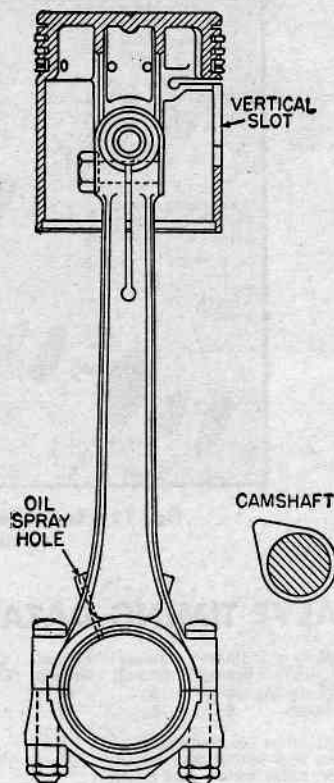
Assemble pistons and rods as shown. All except "6-226" engine. On "6-226" the oil spray hole faces the camshaft side with the vertical piston slot away from the camshaft side
